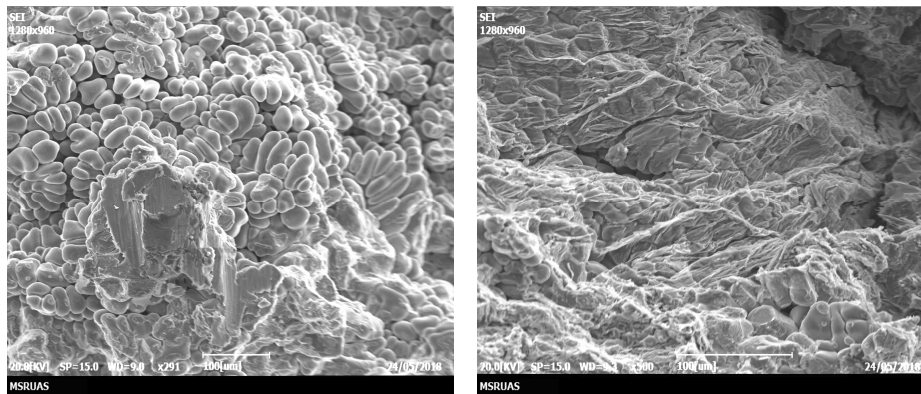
(c): Fractographs of the Tensile Specimen Shows Fractured and Pullout Reinforcement from the Specimen
